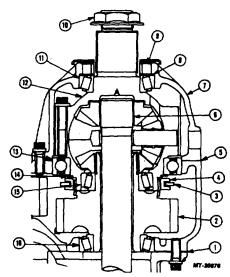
Inter-Axle Differential Nose Cone Cross Section
